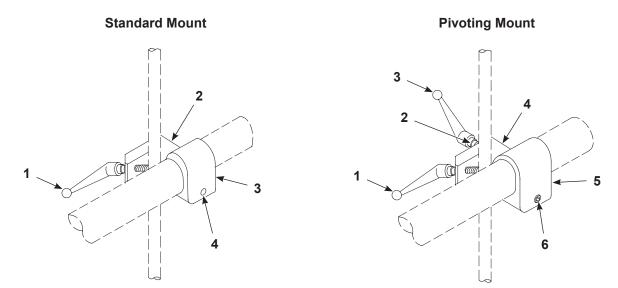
Spray Gun Bar Mounts for Tube-Mount Spray Guns
